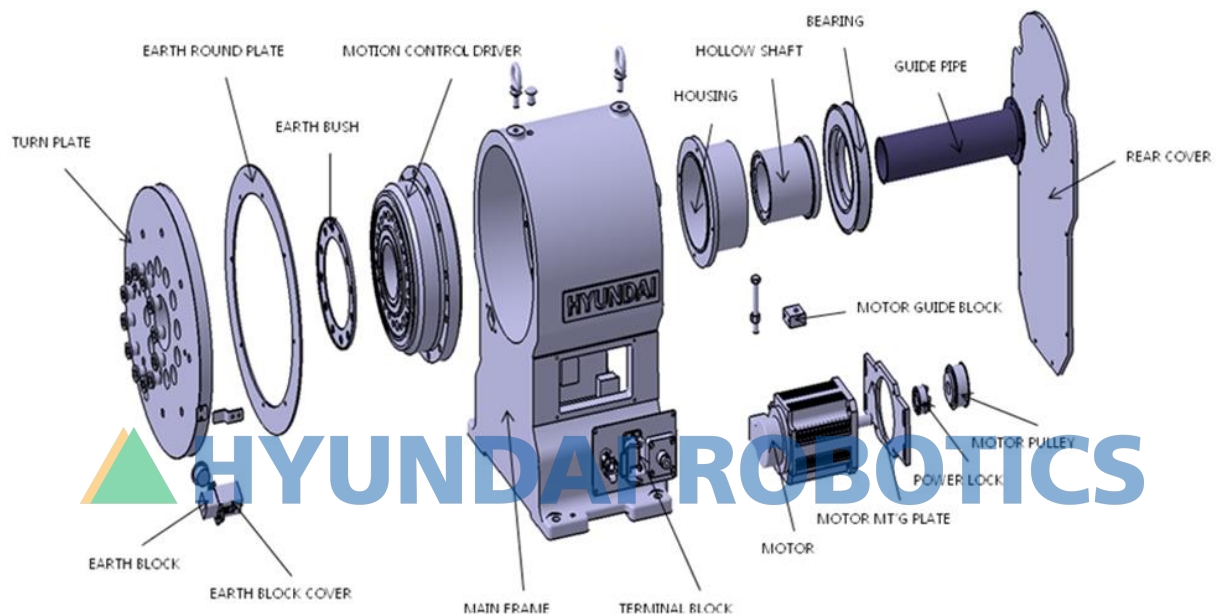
Exploded-View Drawing of One-Axis Positioner
